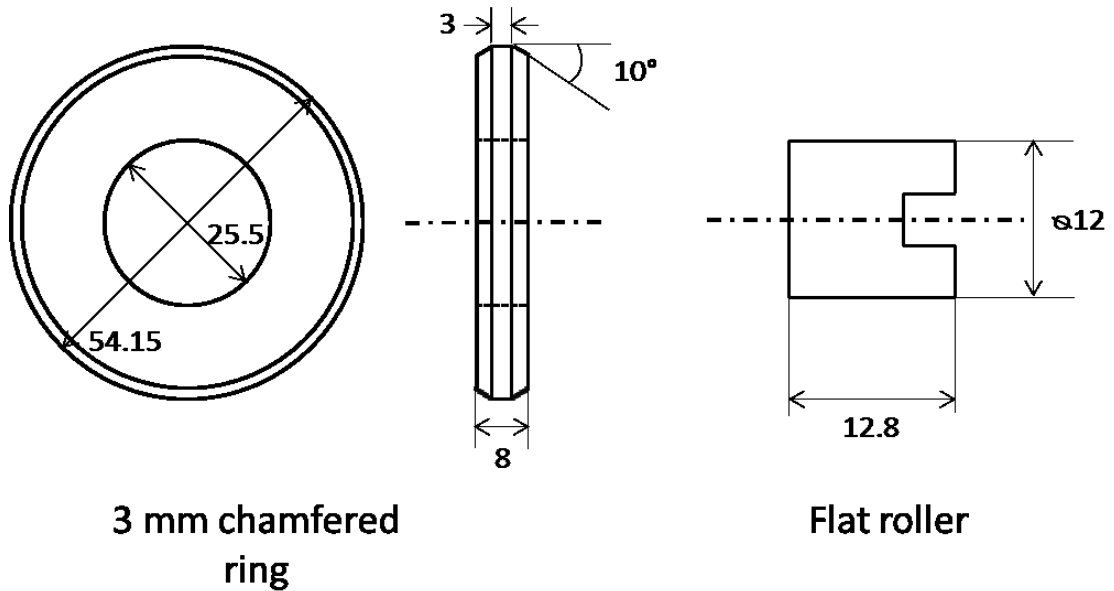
Line contact configuration: 3 mm chamfered ring on a flat roller
